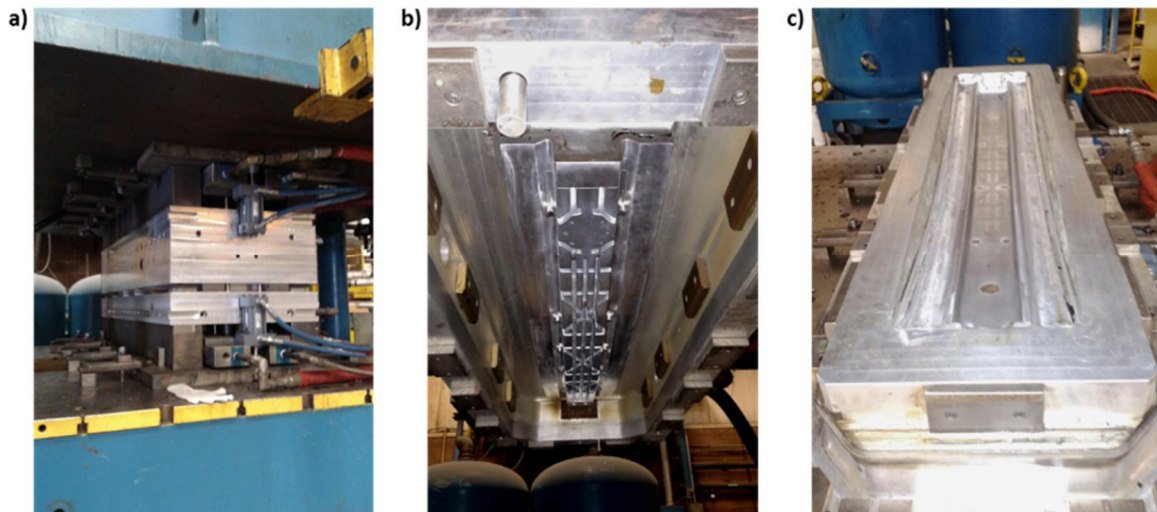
Images of the bumper beam mold. a) The mold shown in the closed state in the press. b) The upper half of the mold. c) The lower half of the mold.
